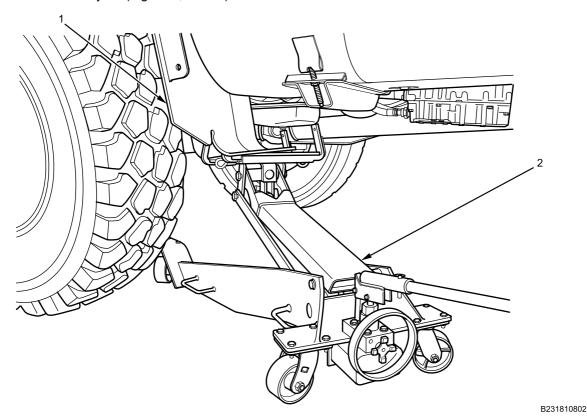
Lower Inner Wheel Deflector Armor Plate.
